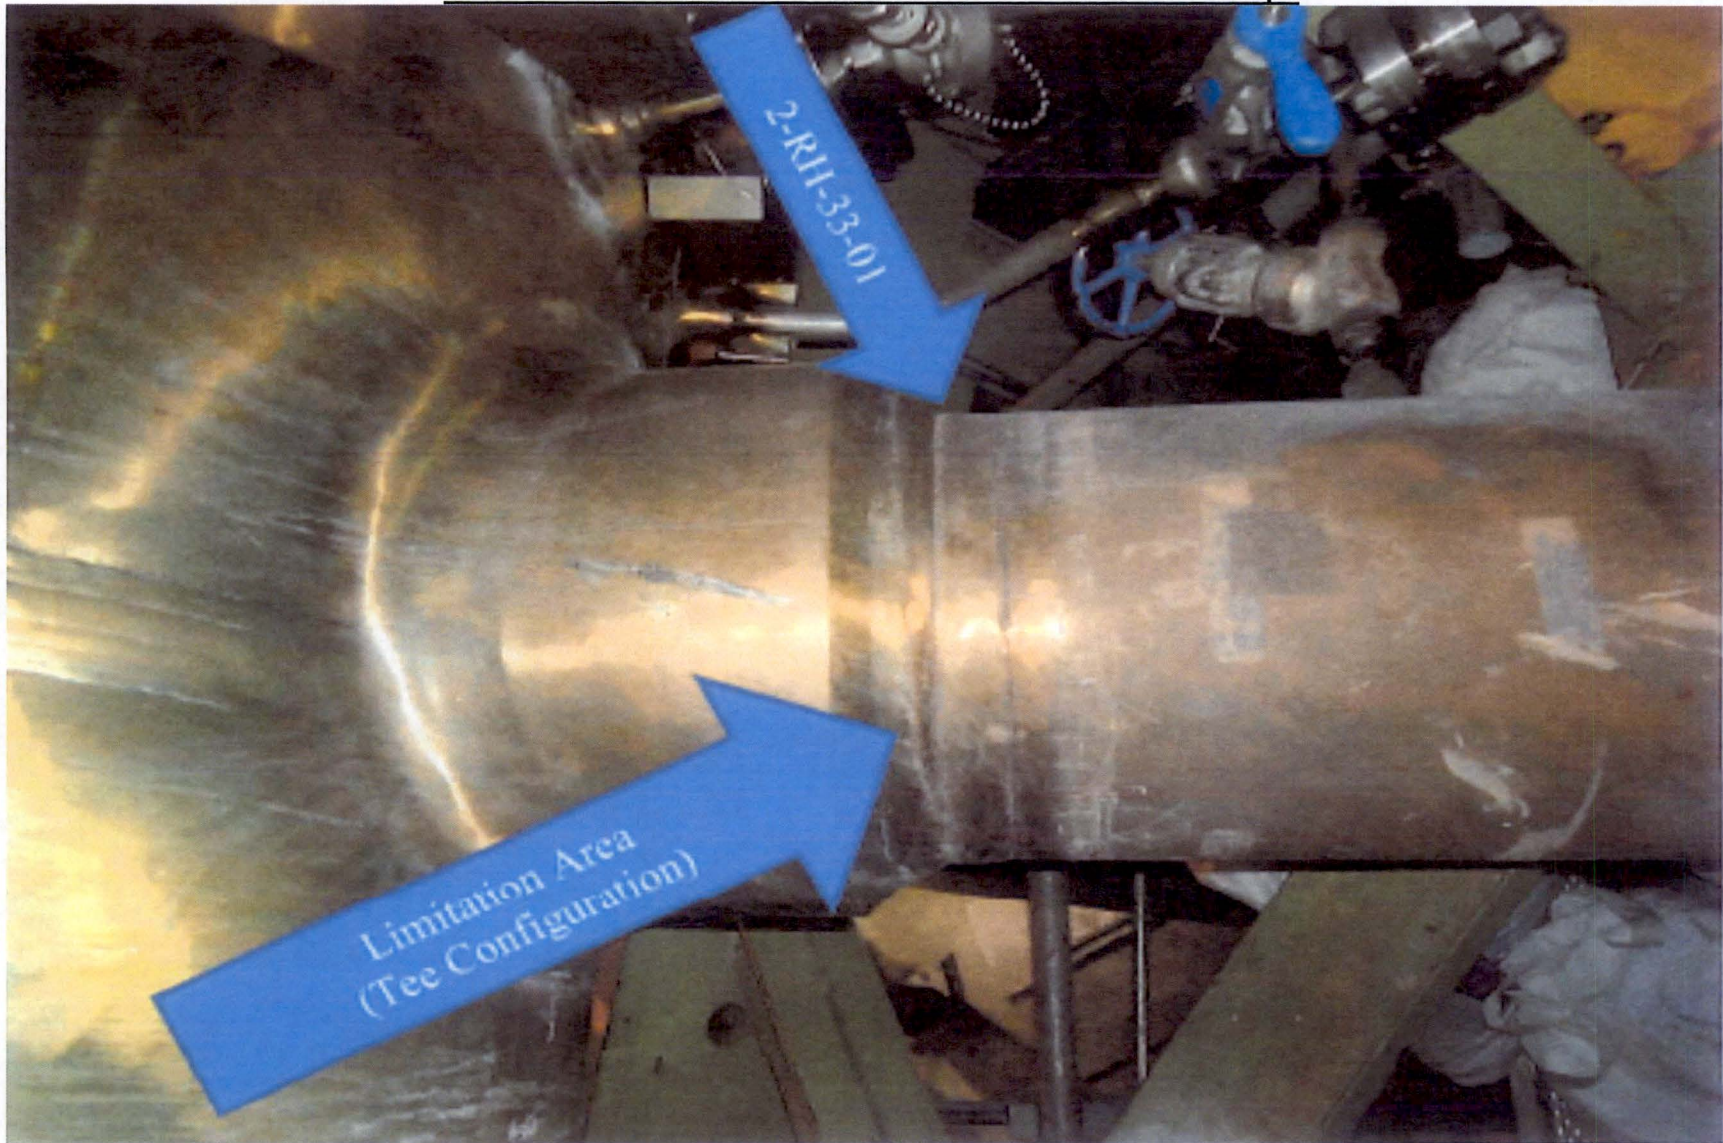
Weld 2-RH-33-01 Component Photograph
